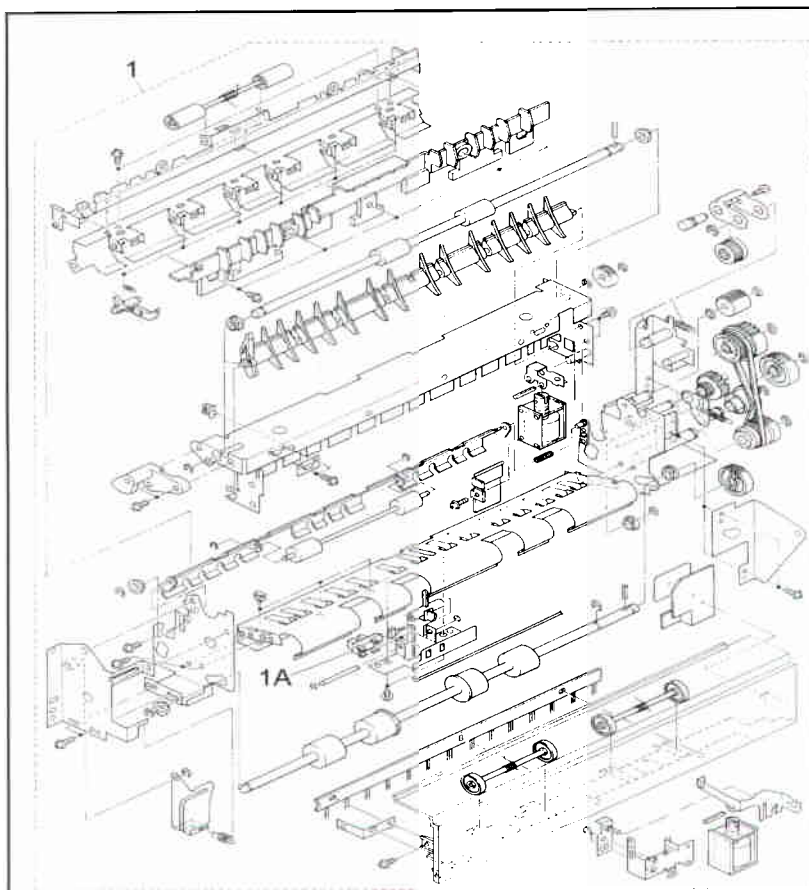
Paper Feed Assembly (Page 2 of 2)
